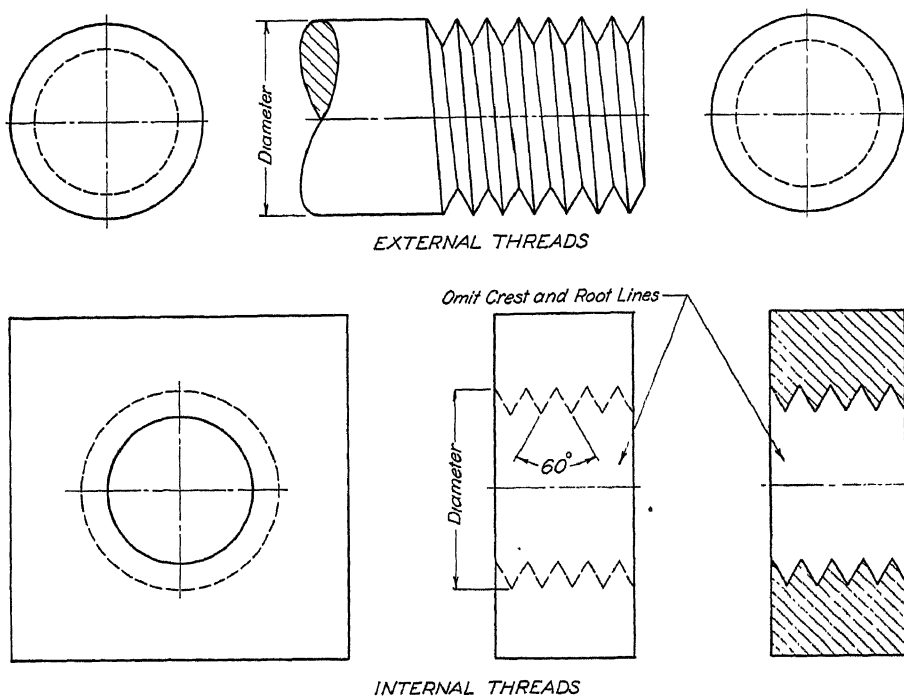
Thread representation (suggested for threads drawn 1 inch or over).
